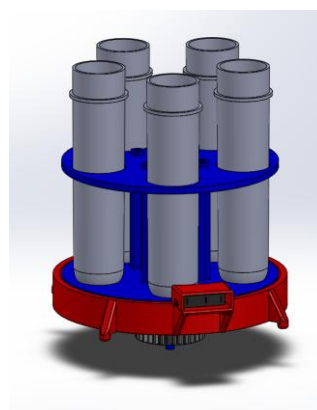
Test tube rotating rack system viewed in SolidWorks.
